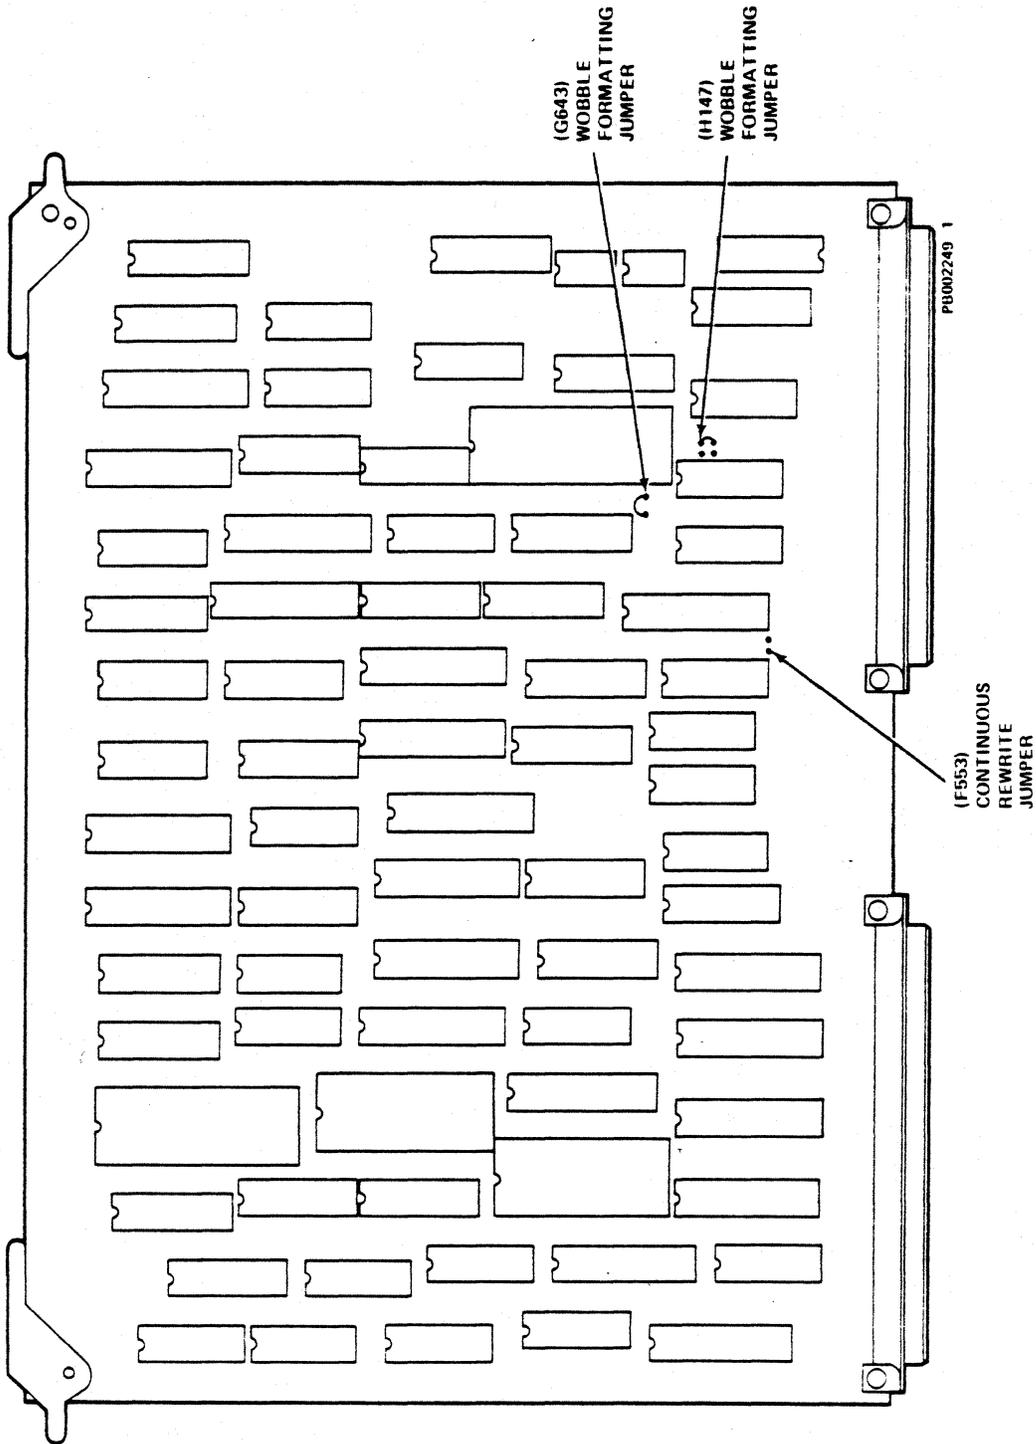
Modulator Demodulator Synchronizer PCA, Component Side
